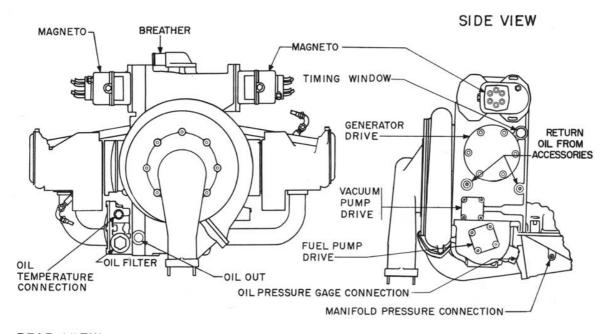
Side View, typical Engine – Rear Mounted Accessories
